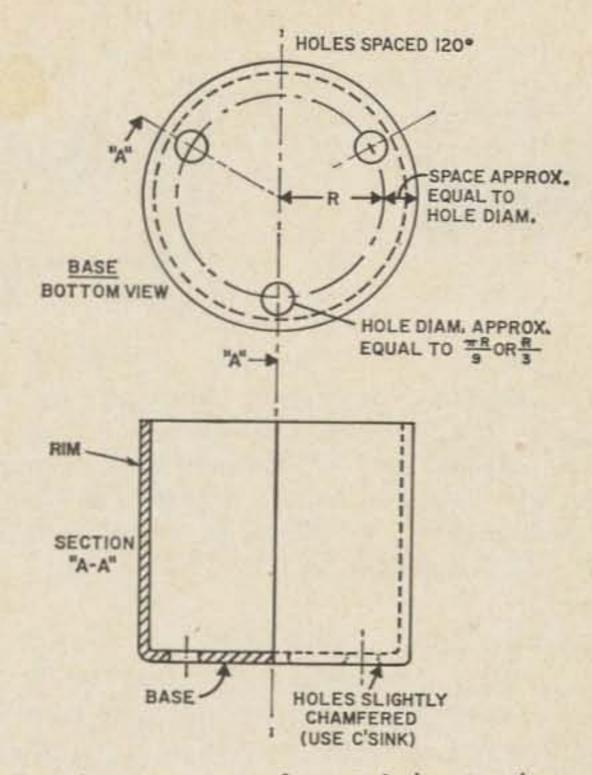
Arrangement of vent holes in the copper pipe cap heat sinks.
